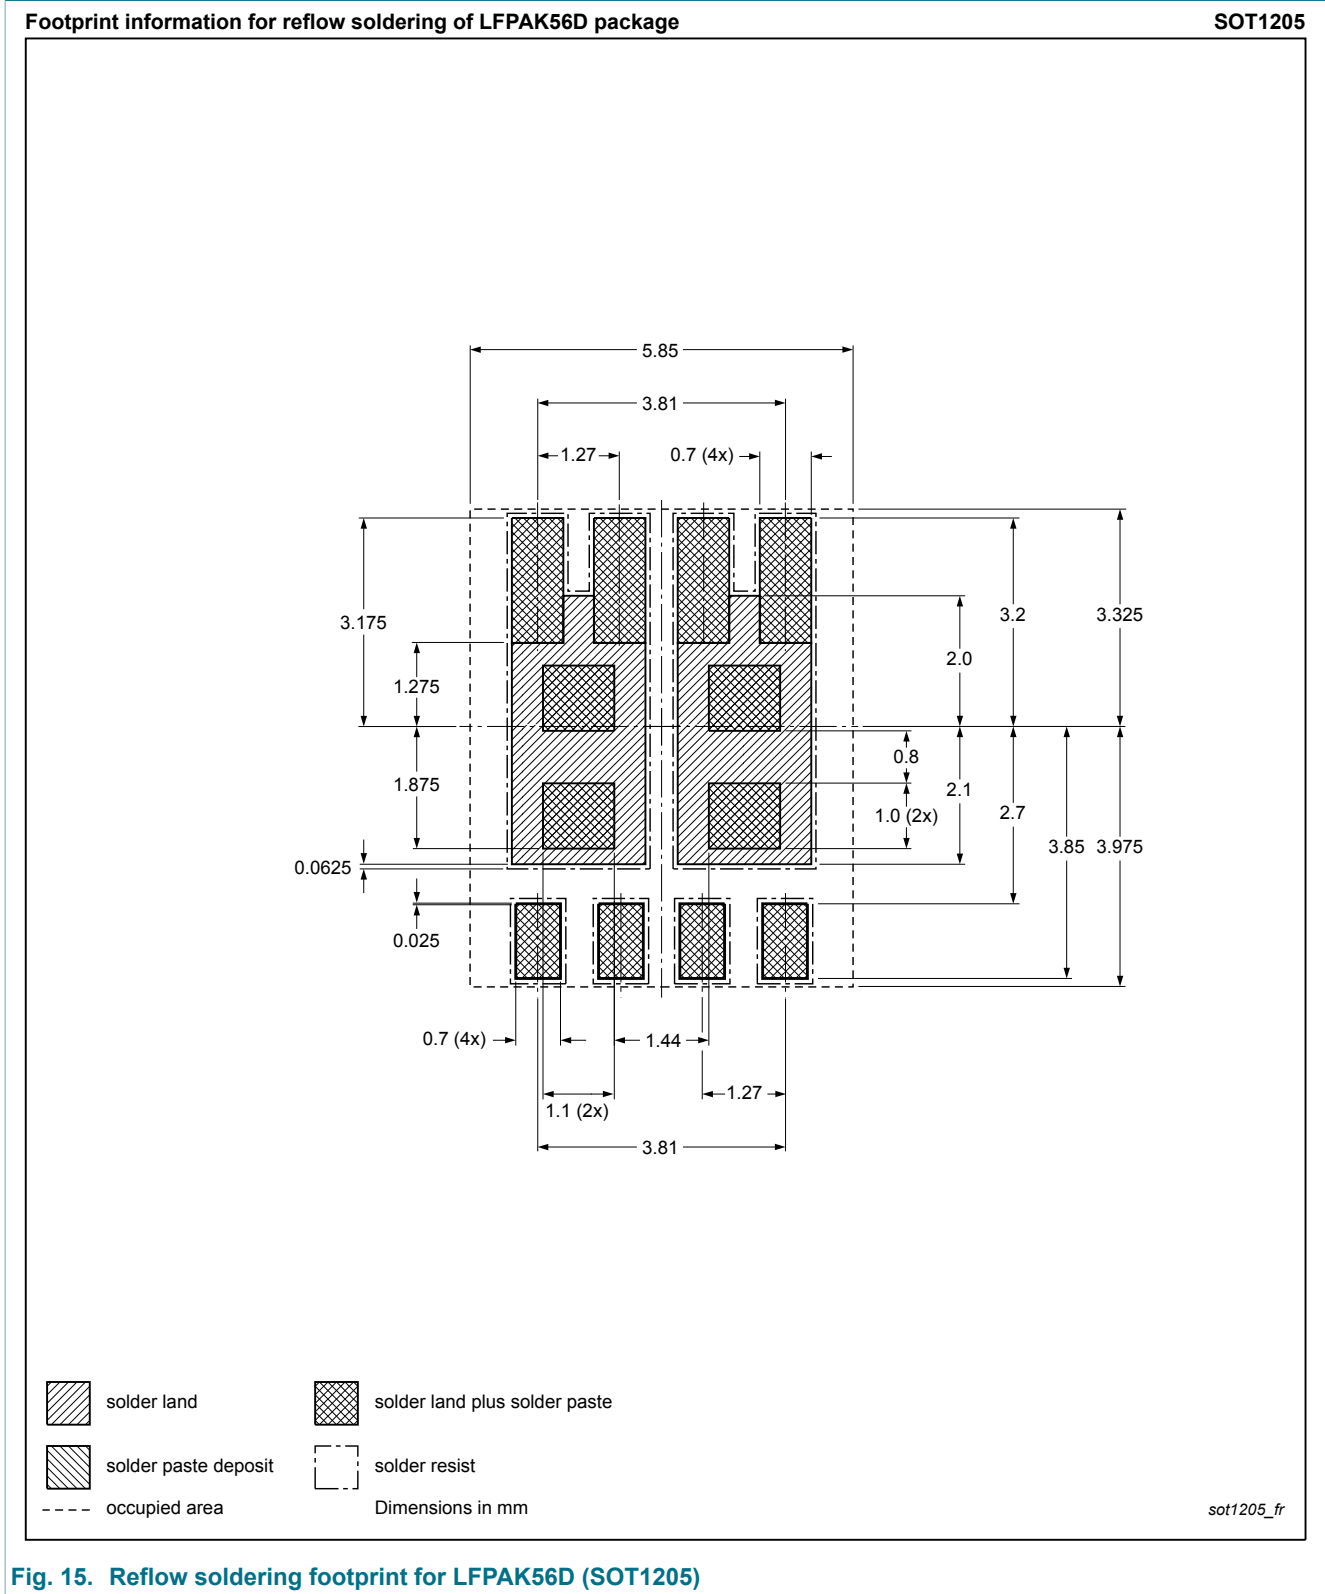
Reflow soldering footprint for LFPAK56D (SOT1205)
